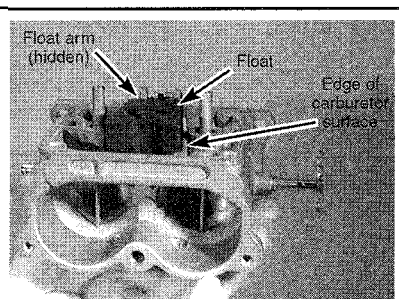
Check the float closed height (the float leading edge should be about level with the gasket)
